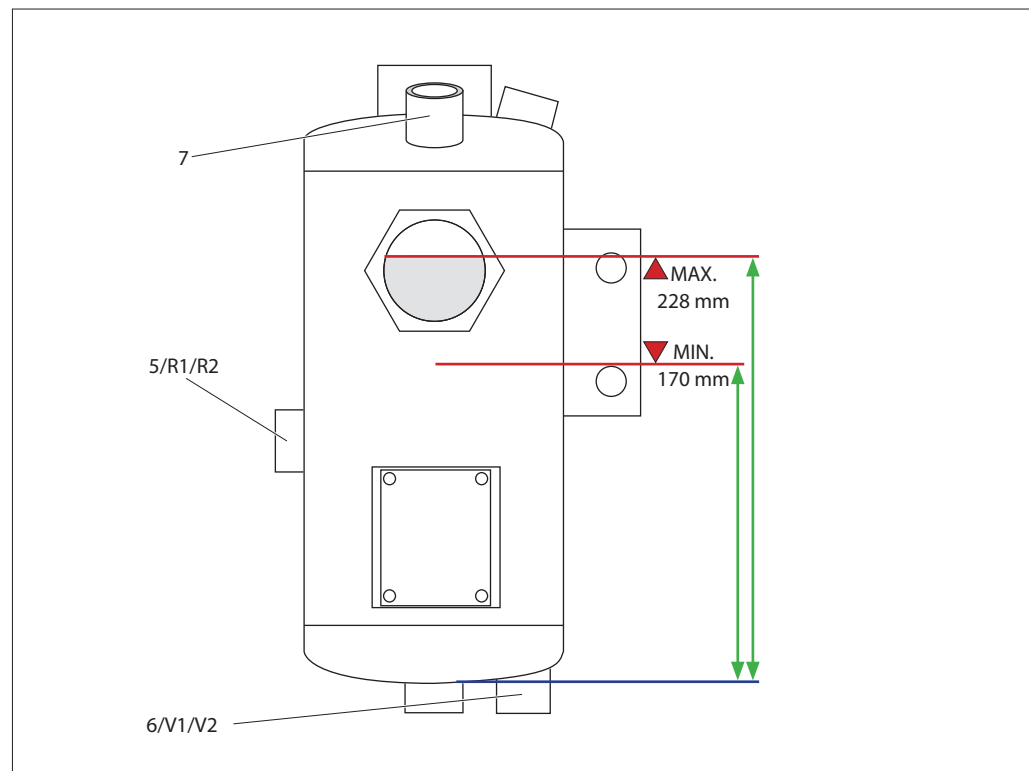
Chetra 3LS" pressure vessel with connection options - front view. For the complete designation of the individual parts see chapter "10.10 Chetra 3 LS pressure vessel"
